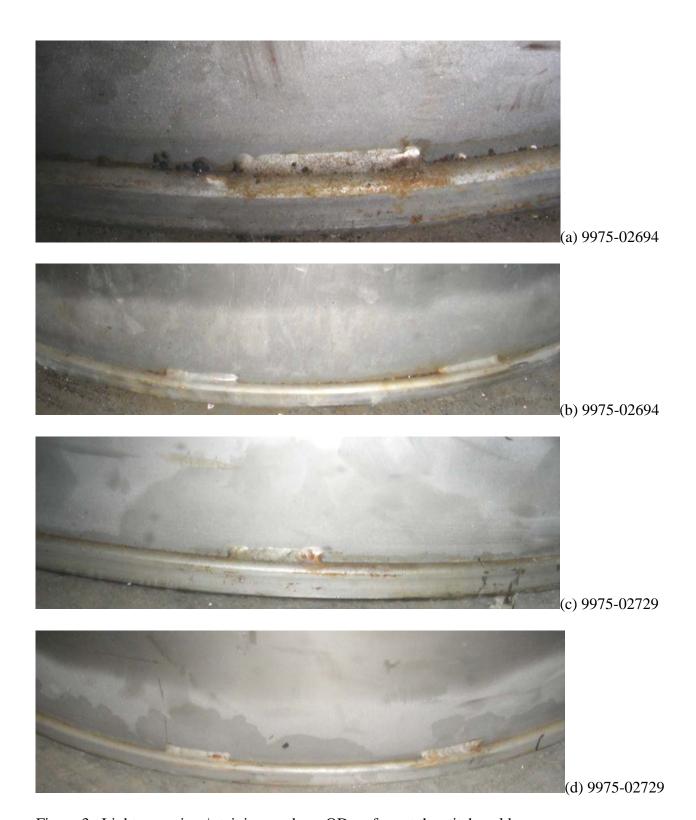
Light corrosion / staining on drum OD surface at the stitch welds.
